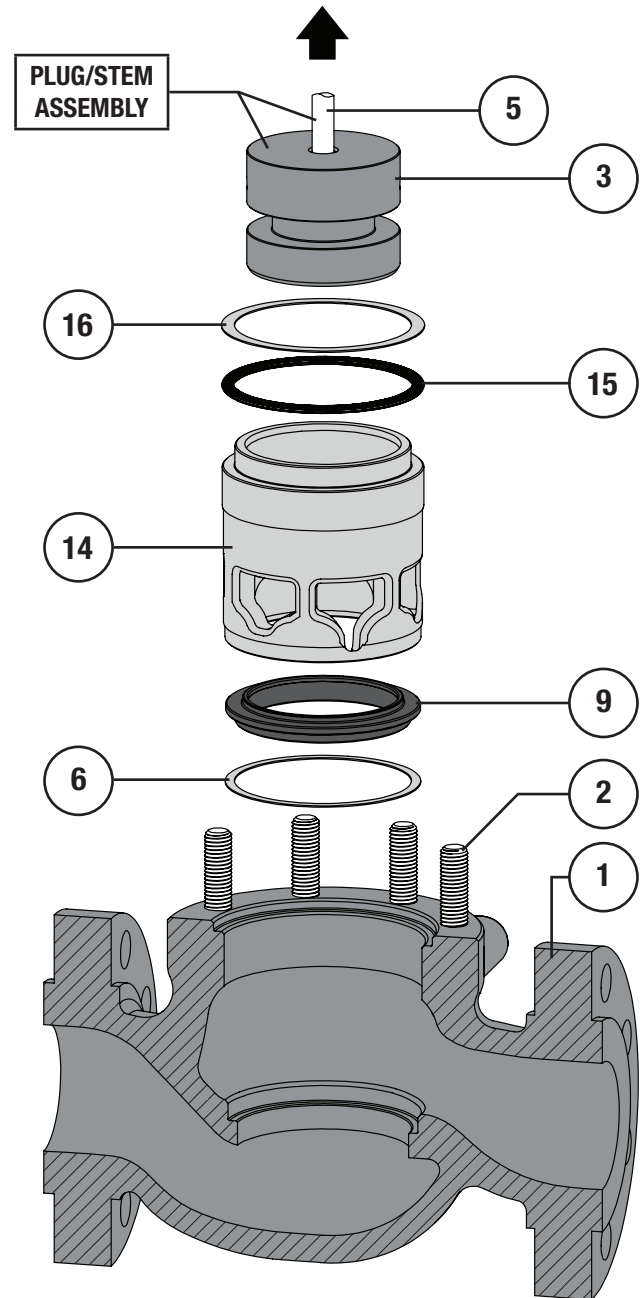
Standard Trim Parts Removal (Steps 1 - 6)
